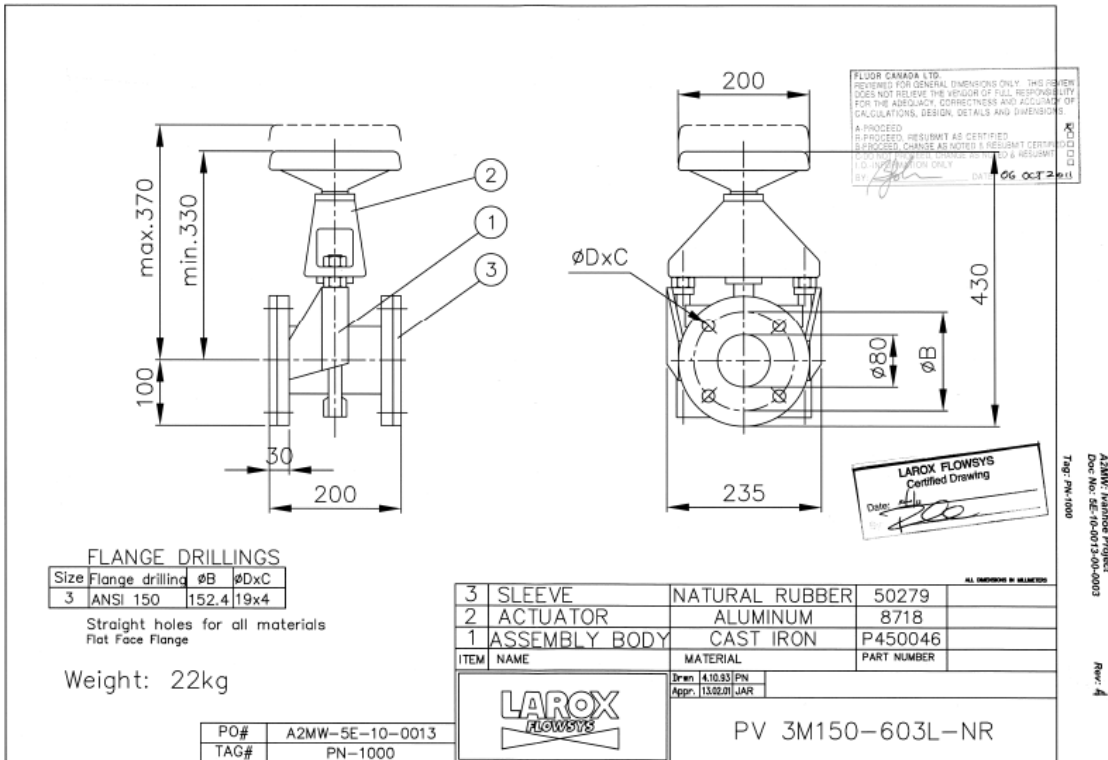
Technical drawing of pneumatic operated pinch valve
